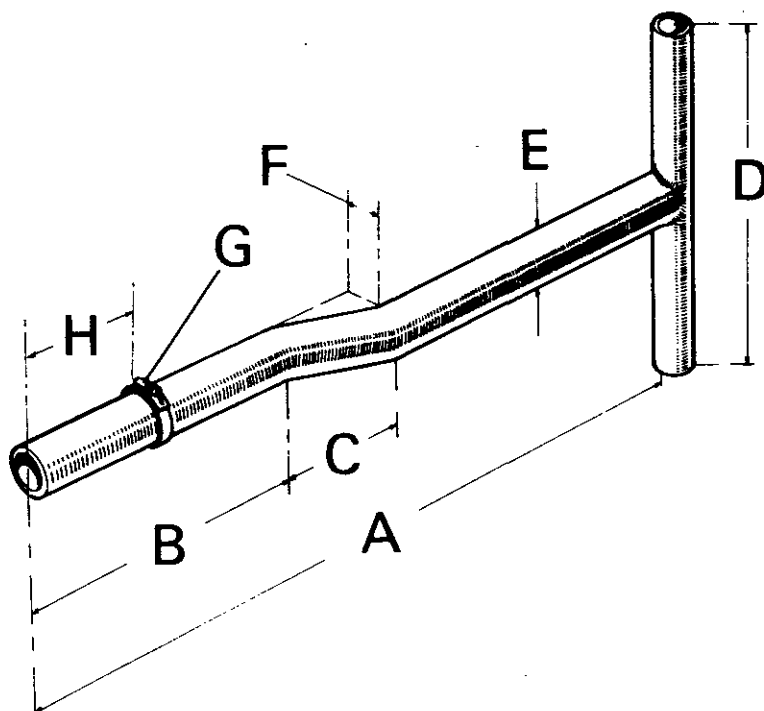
TOOL FOR REPLACING DIFFERENTIAL LOCK SLEEVE
